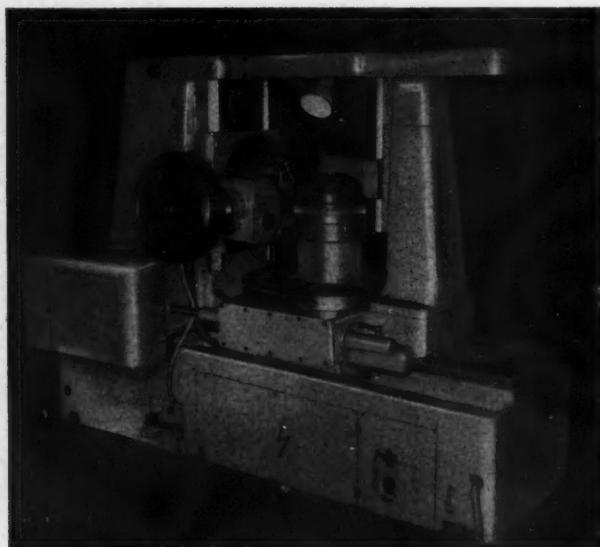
Of straightforward design, this type Y 3180, universal gear hobbing machine will cut gears up to 3·17 d.p., and of 21·6 in. maximum diameter, with the supporting column in position
